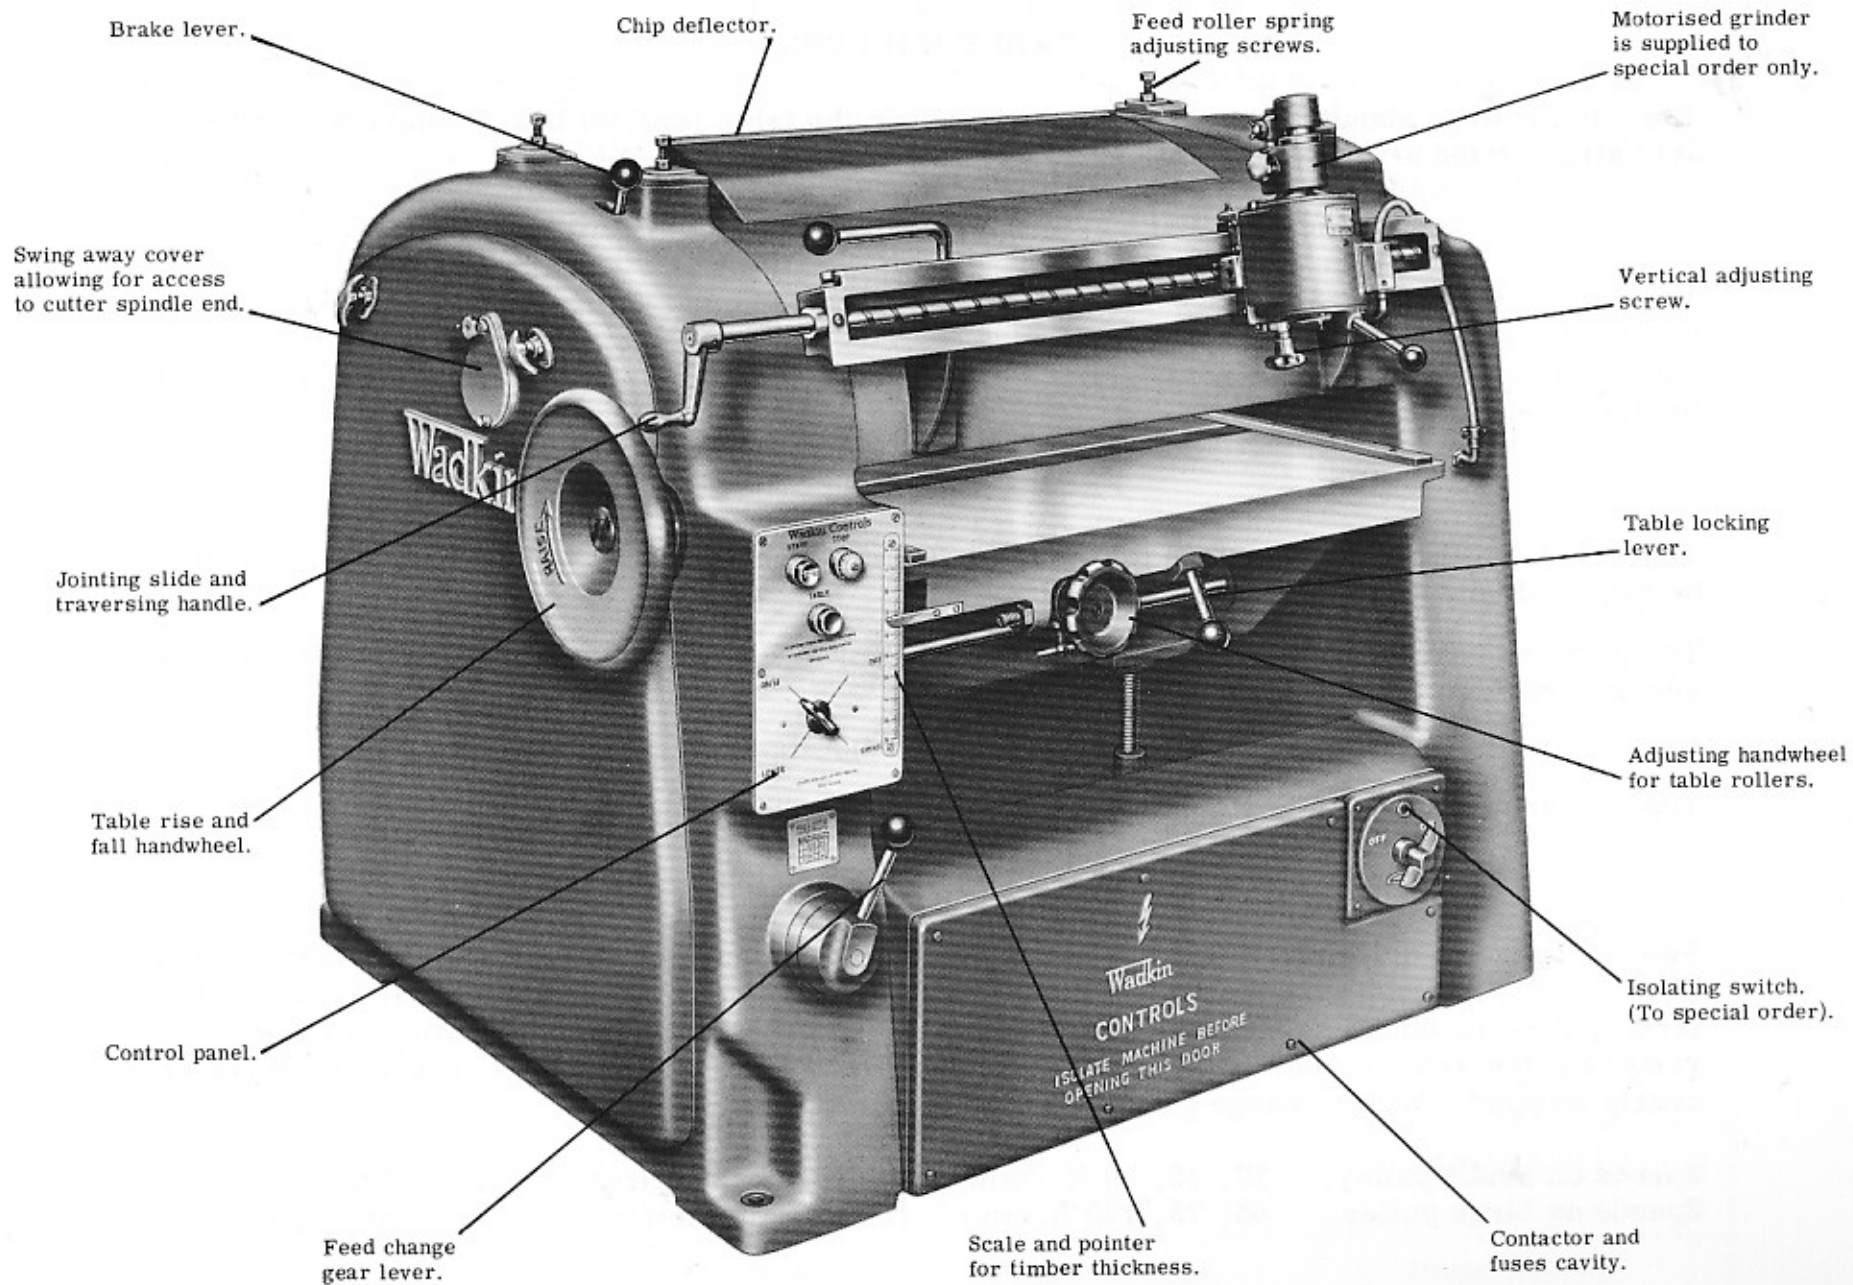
FRONT VIEW OF MACHINE SHOWING PRINCIPAL CONTROLS.
